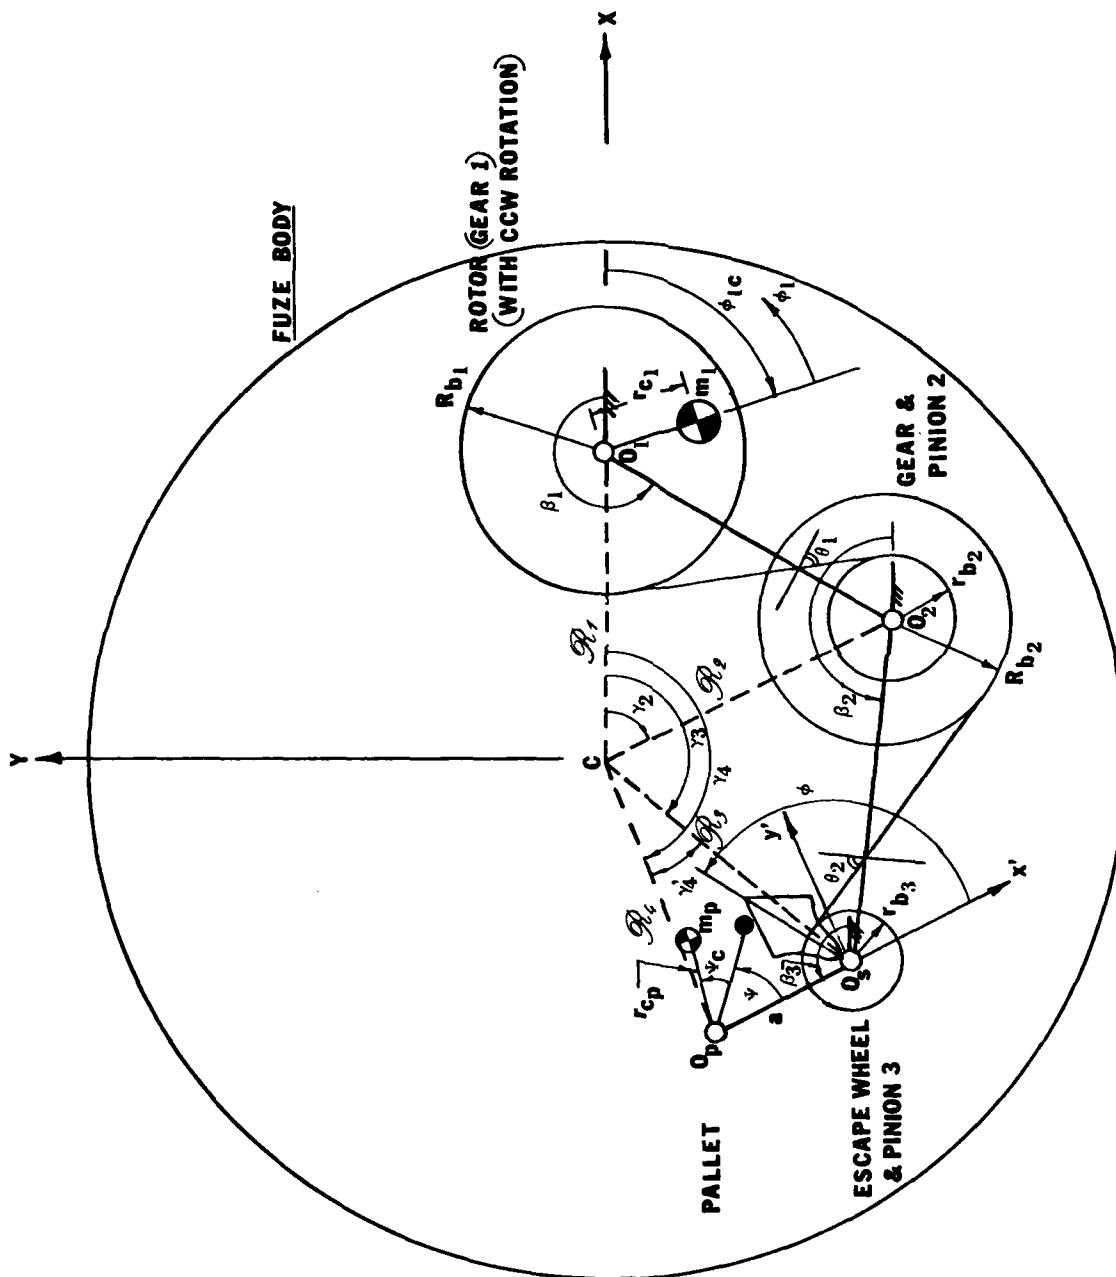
Rotor driven S&A device with two pass step-up gear train, configuration no. 2
